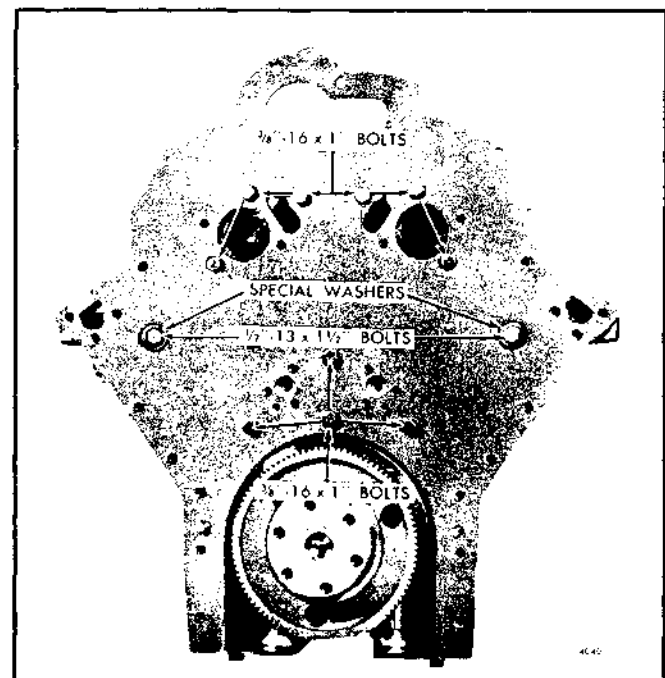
Cylinder Block Rear End Plate Mounting (V-Type Engine)
